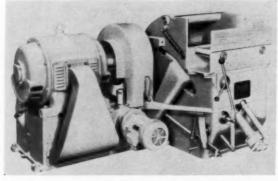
Machine for cutting wood shavings, made by F. Meyer & Schwabedissen. The knives are mounted on a cylinder and are held in position with hydraulic pressure. The knife-edges are recessed to produce shavings of desired length. Intermittent feed. Maximum length of wood blocks: about 39 in. Max diameter of wood blocks, about 8 in. Power: 26 kw.
